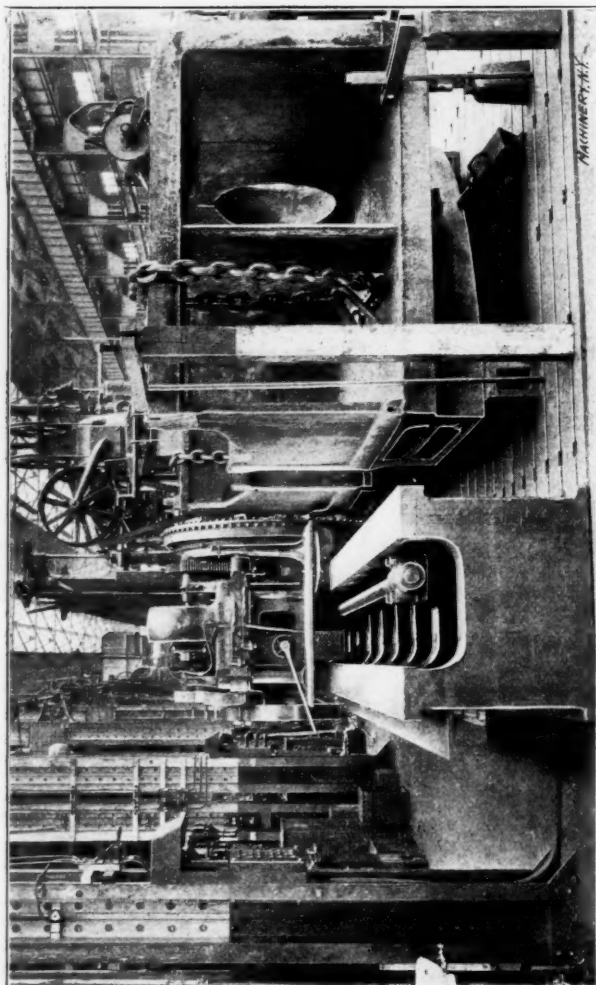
Rotary Planer with Motor Mounted on the Carriage, Surfacing the Joint on a Heavy Turbine Casting.
